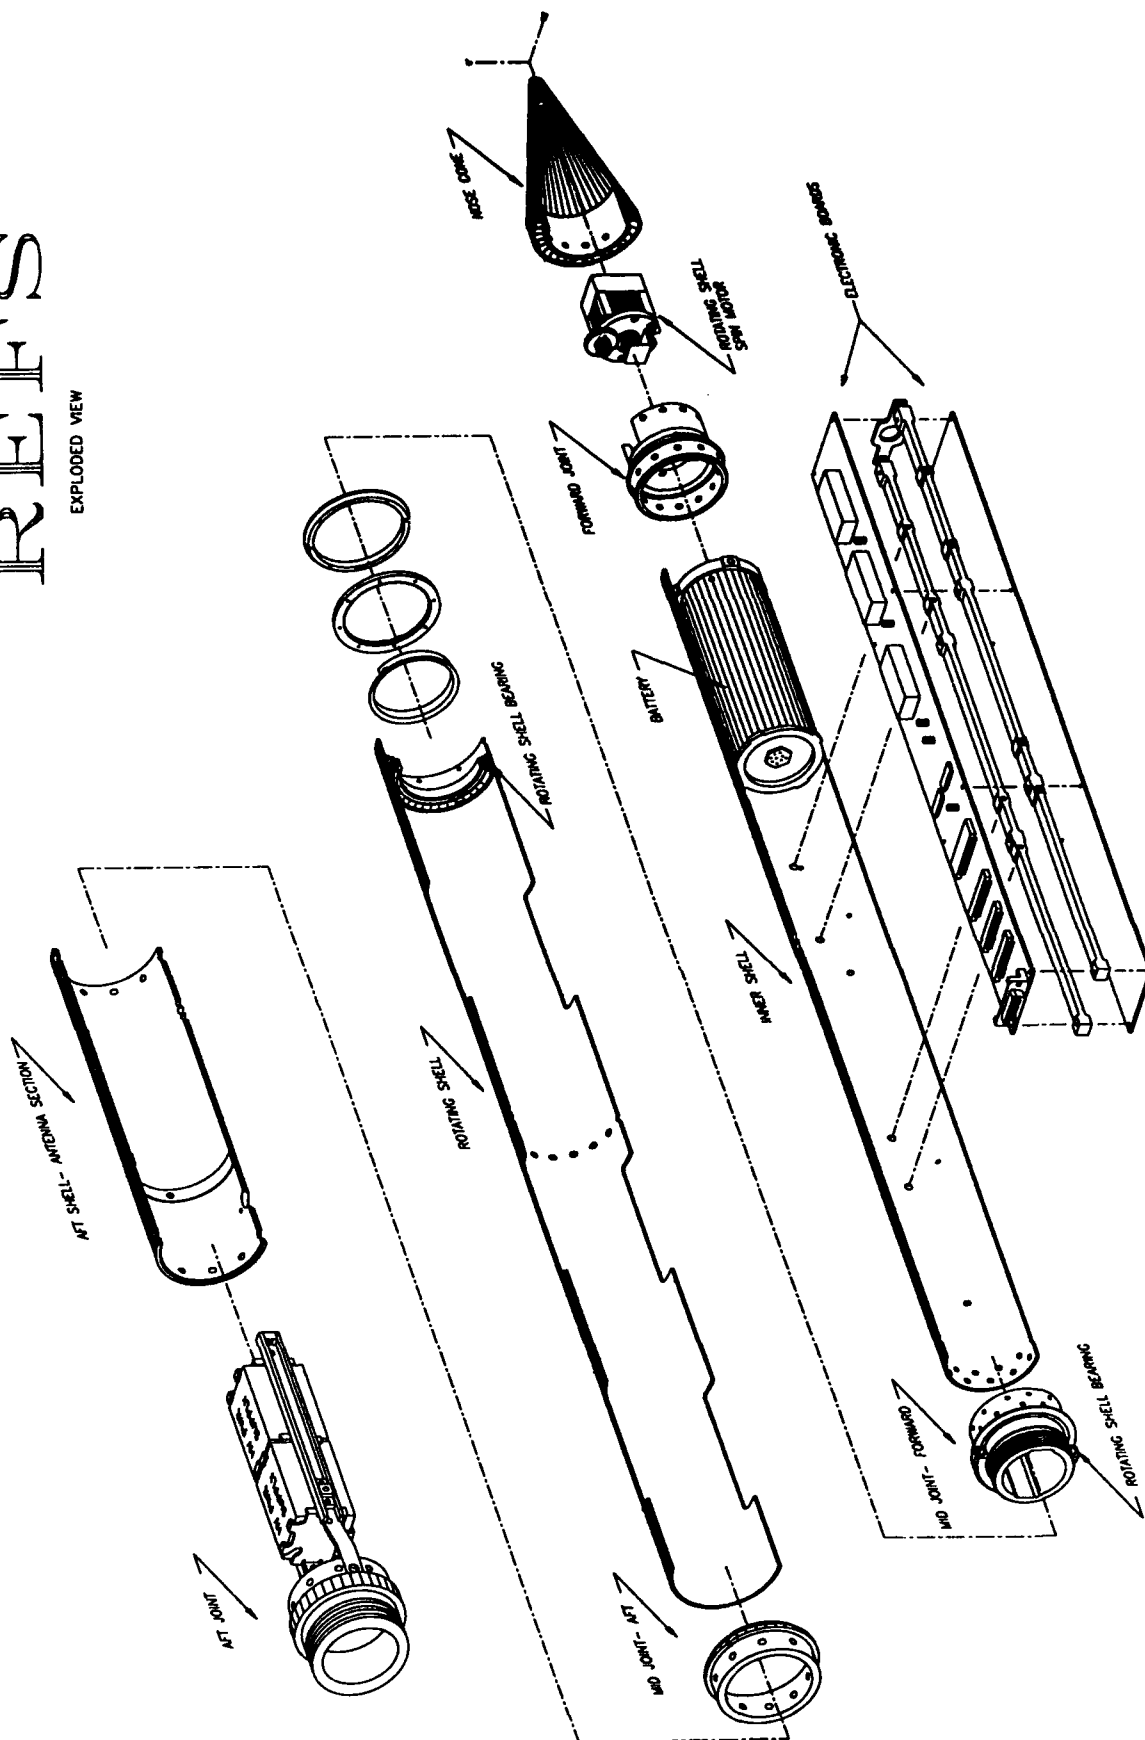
Exploded View of the REFS Payload, Showing all Major Structural Parts and Subsystems Except the S-band Transmitter. For actual mechanical designs and electronics diagrams, see the attached Drawings and Schematics.
